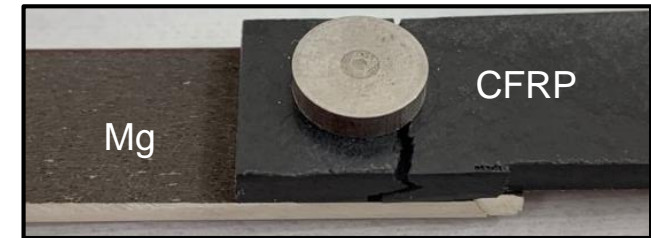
FSI – Linear joint showing fracture in CFRP after lap-shear testing.
